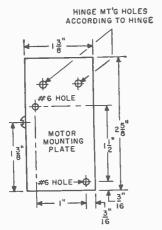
Mount motor to motor mounting plate. Then attach assembly to steering yoke by means of a hinge.
